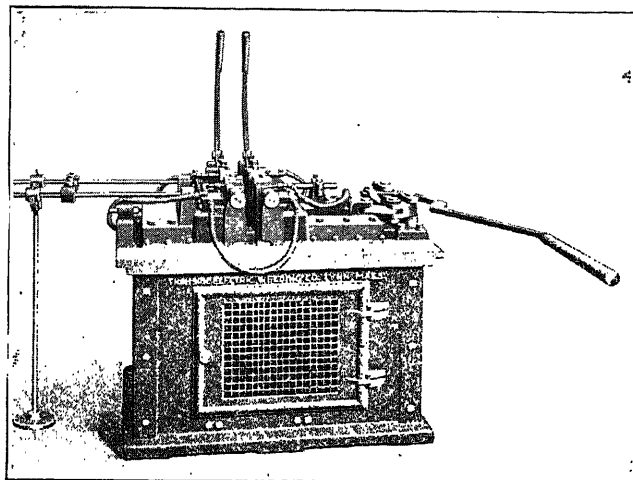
No. 6 Butt-Welding Machine.
